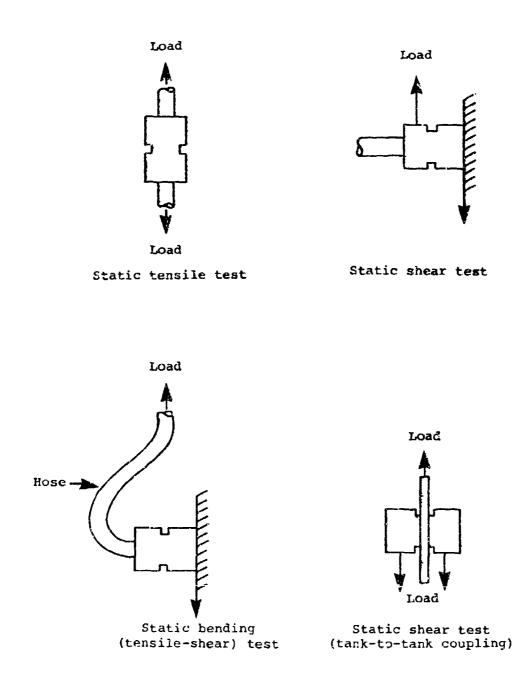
STATIC TENSILE AND SHEAR TEST MODES FOR SELF-SEALING BREAKAWAY VALVES.
